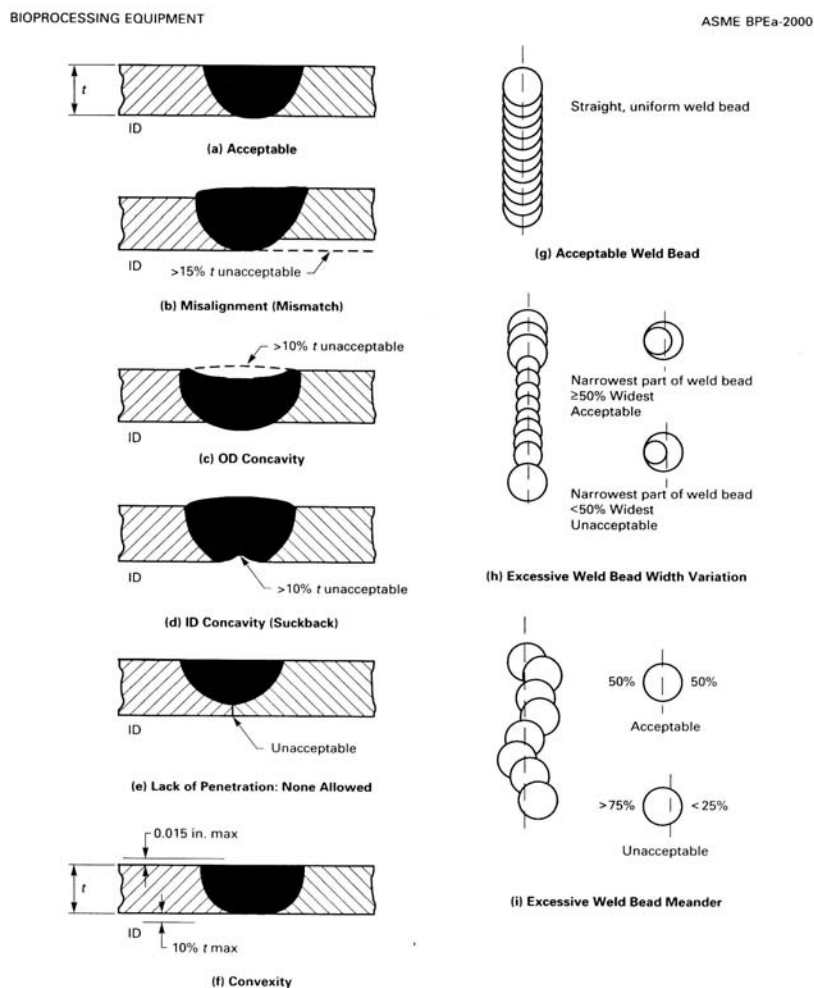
ACCEPTABLE AND UNACCEPTABLE WELD PROFILES FOR TUBE WELDS
